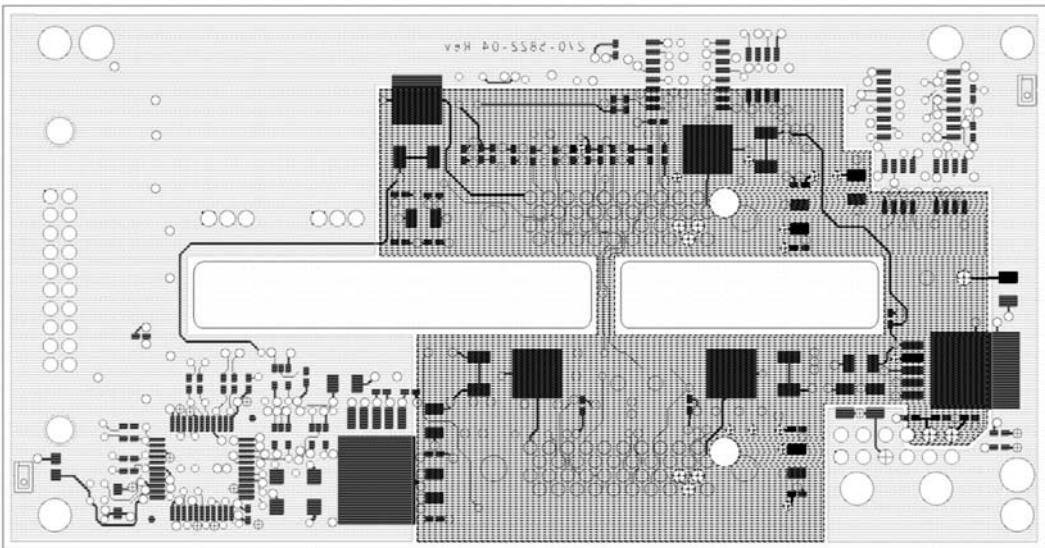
Within the outer rectangular board outline, there is an inner odd-outline plane shape with a varying degree of perforations, due to smaller and larger holes, as well as with a large cutout.
